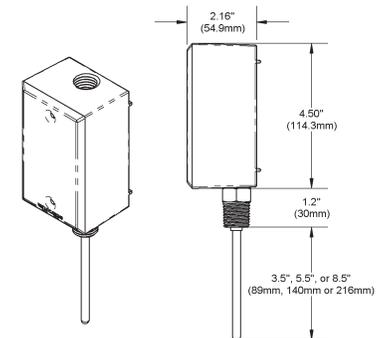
Double Threaded Immersion Sensor in a Weatherproof (WPO) Enclosure with "Outside Mount" Configuration.
